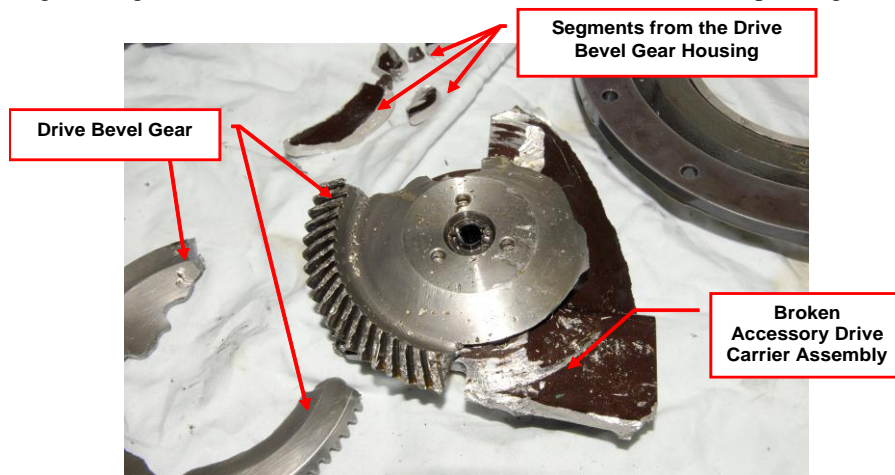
Photograph of the drive bevel gear segments. The largest segment has its respective bearing still attached to the housing
